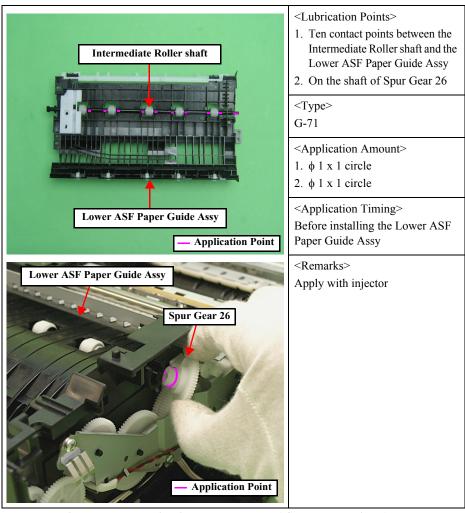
Lubrication of the Lower ASF Paper Guide Assy
